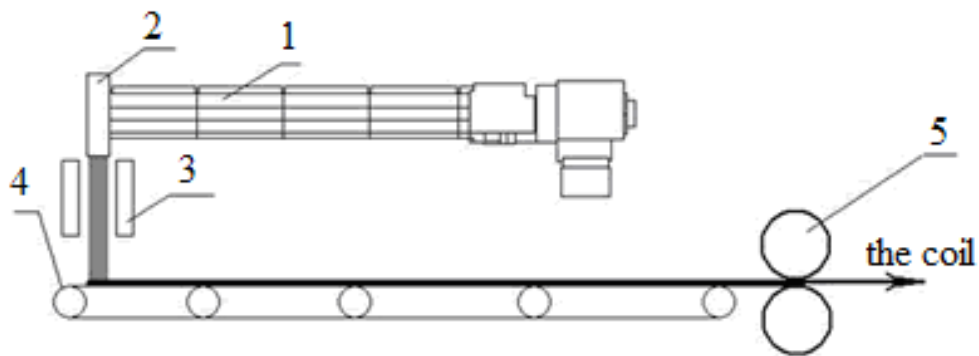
Block diagram of the installation for the production of polypropylene filter material: 1 - extruder; 2 - forming head; 3 - die; 4 - the pipeline; 5 – drums
